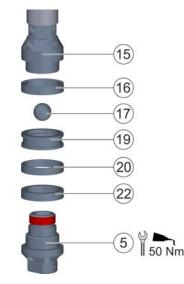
Dismantle upper piston rod N24270003, N24270005
